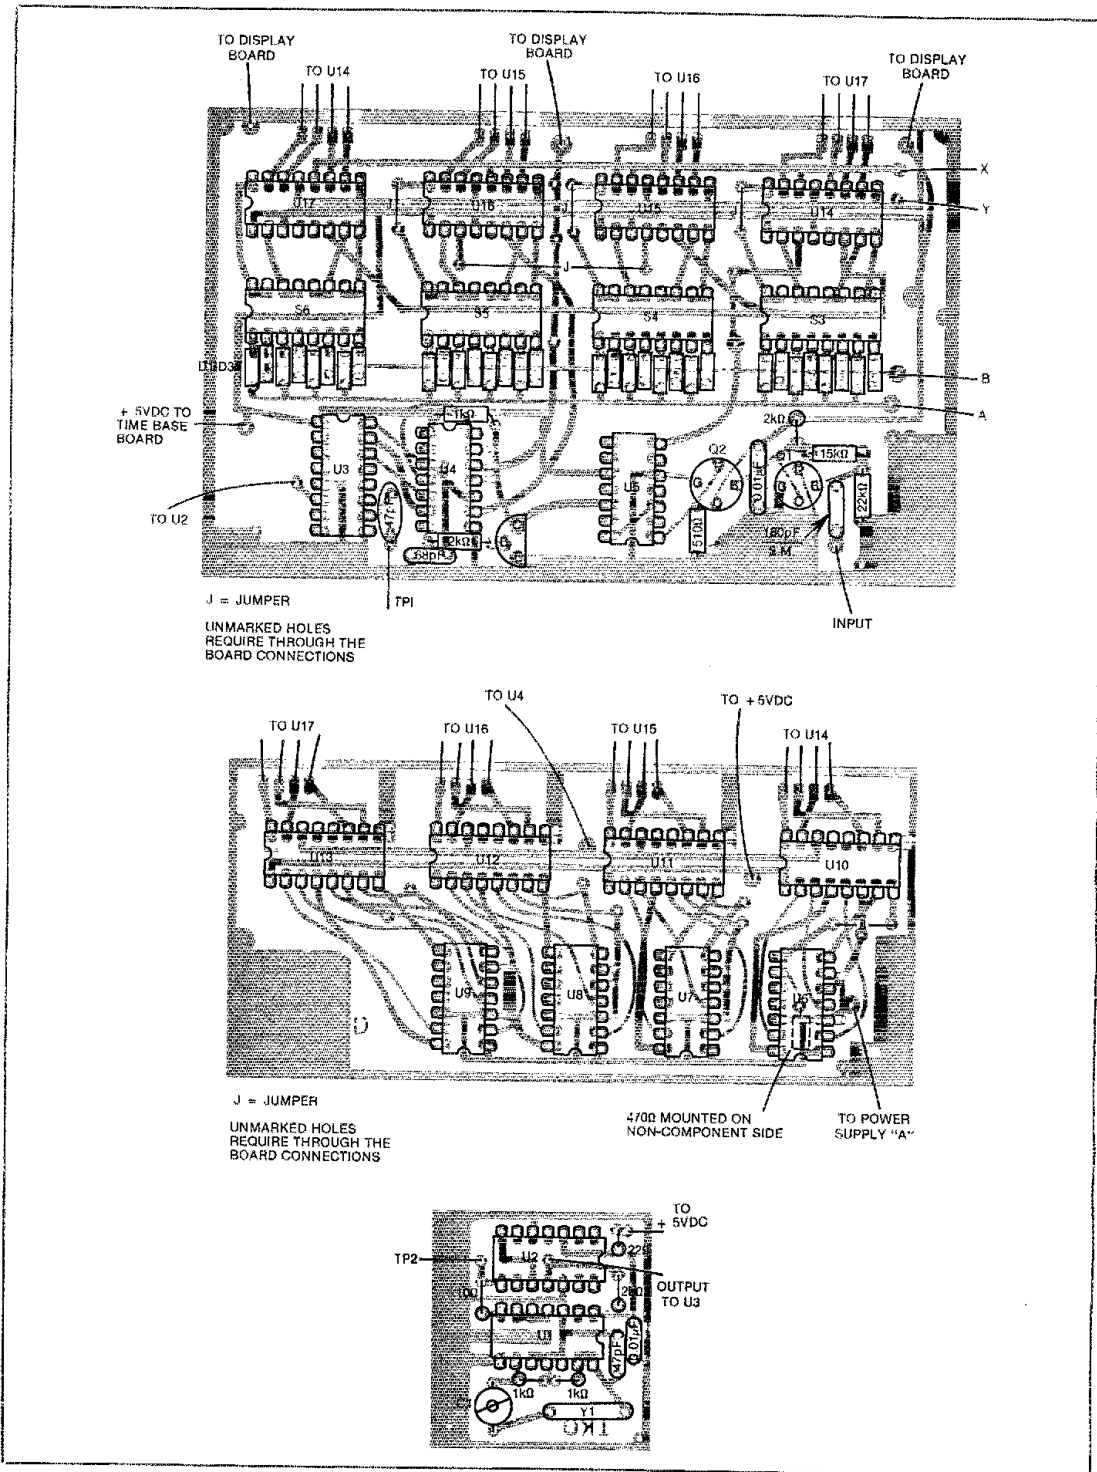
Circuit-board layouts for the main, display and oscillator boards. The main and display boards are double sided with a foil pattern on each side. Here the two sides are shown superimposed to aid in parts location. The oscillator is built on a single-sided board. Etching patterns for these boards are shown in the "Hints and Kinks" section of this issue.
